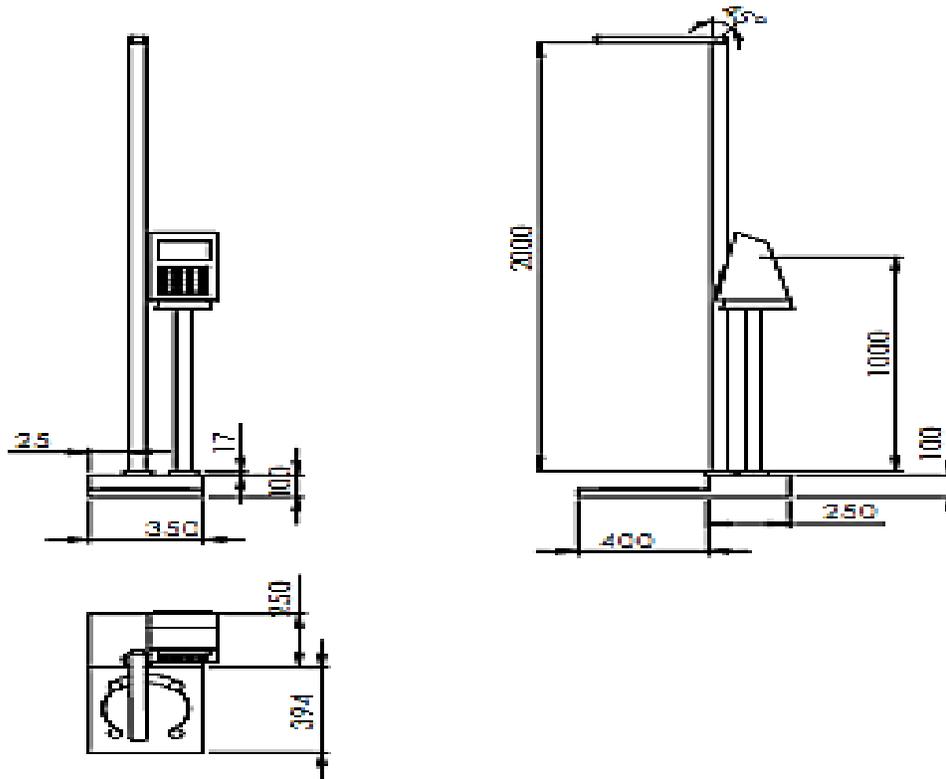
Assembly Drawing of Body Mass Index (BMI)
